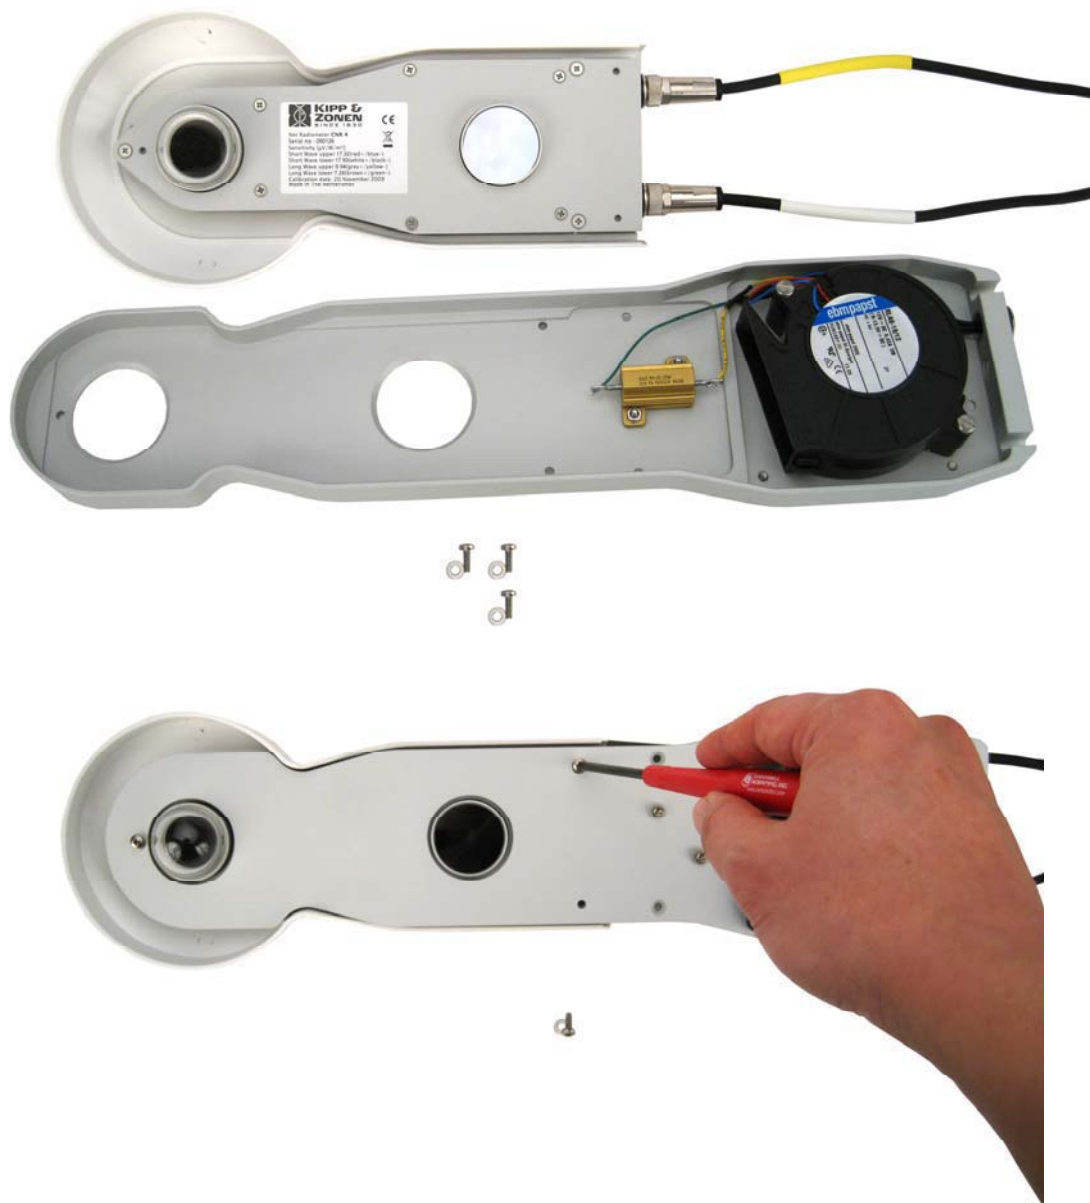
Attaching the CNF4 to CNR4 using pan-head screws and washers.
